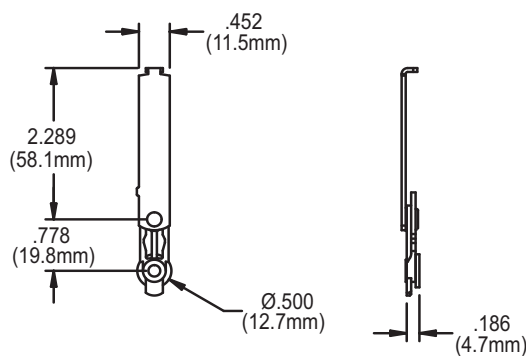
BACKPLATE LINK ASSEMBLY (11645.92)
